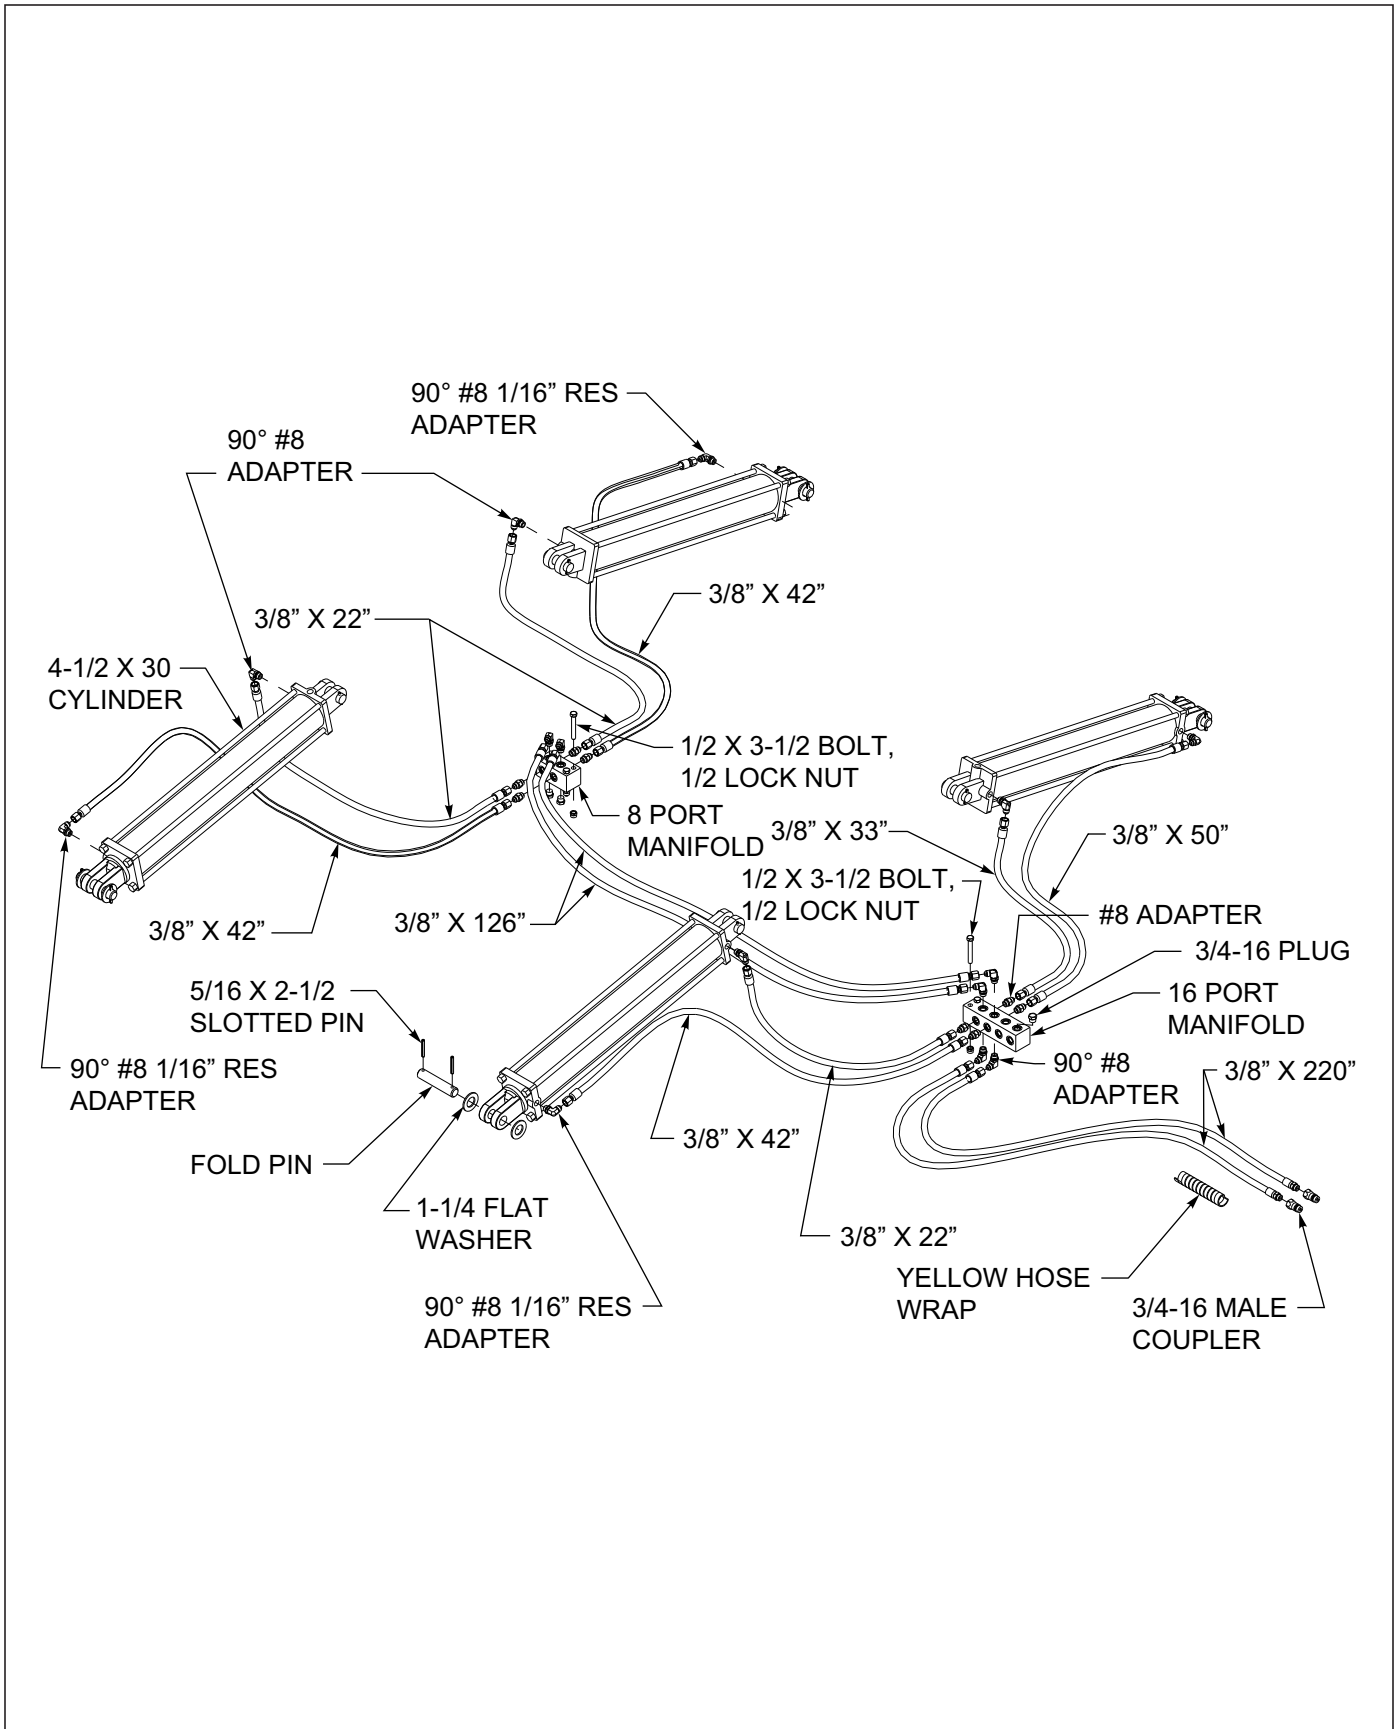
Fold Hydraulic Installation - 21', 23', & 26' (Single)
